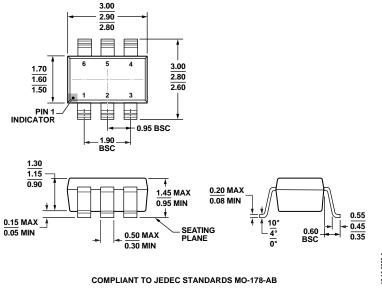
6-Lead Small Outline Transistor Package [SOT-23] (RJ-6) Dimensions shown in millimeters
